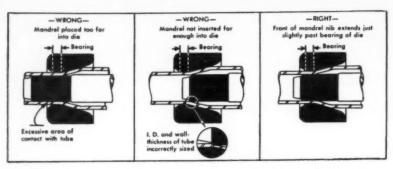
Set straight Carboloy mandrel into die so that end of chamfer extends just slightly past the bearing.
